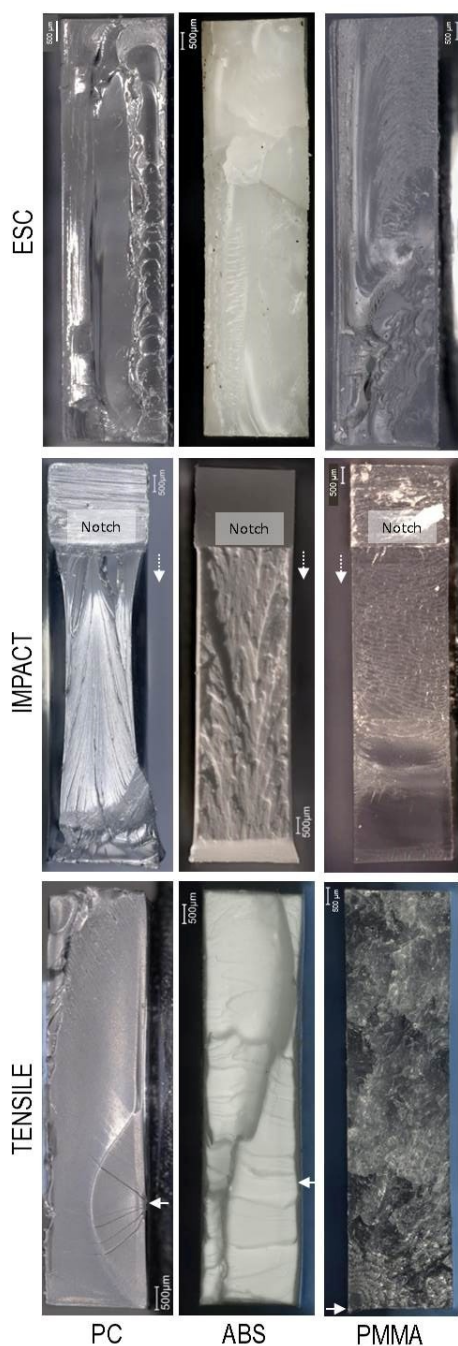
| Optical microscopy of representative fracture surfaces for each material and loading mode.
